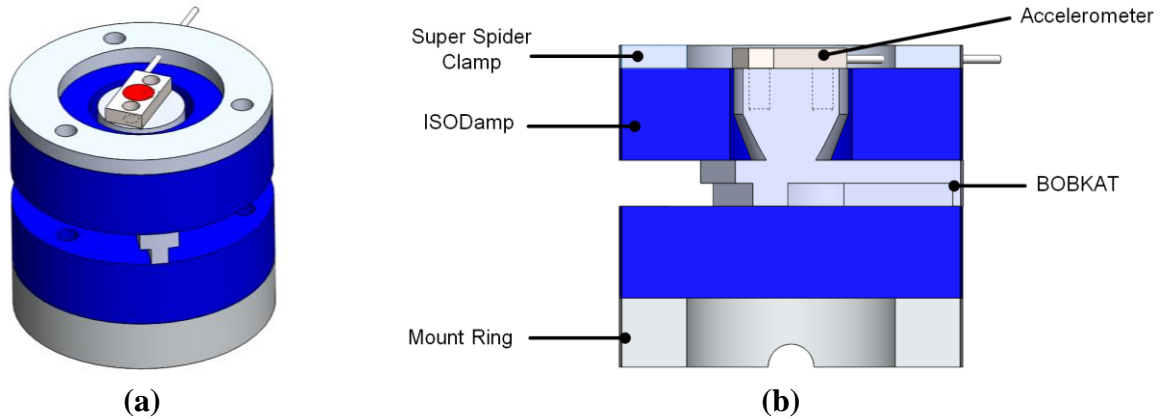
Isometric (a) and Section (b) Views of BOBKAT
